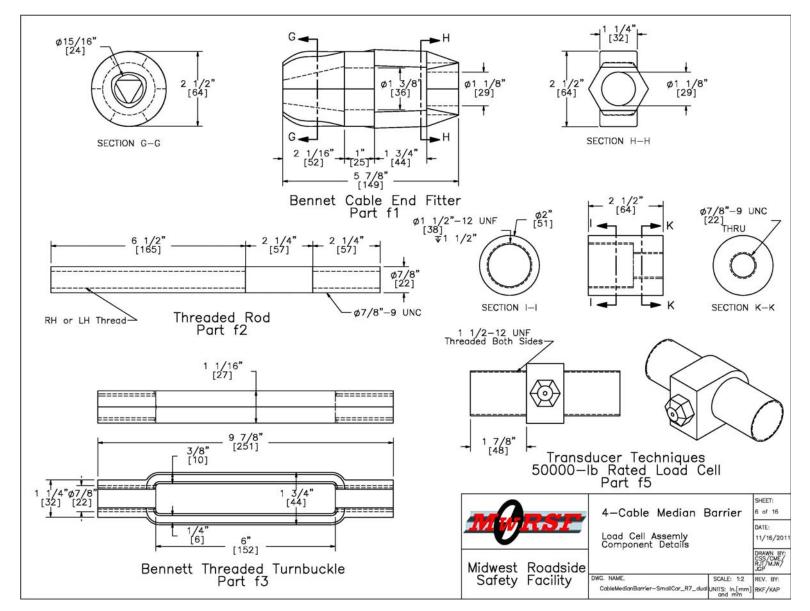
Load Cell Assembly Component Details, Test No. 4CMB-2
